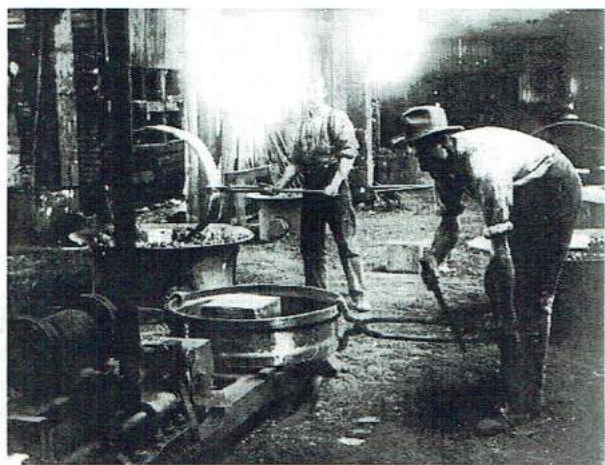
Forge welding the rings [16]. Over 60,000 rings were made in this way.
